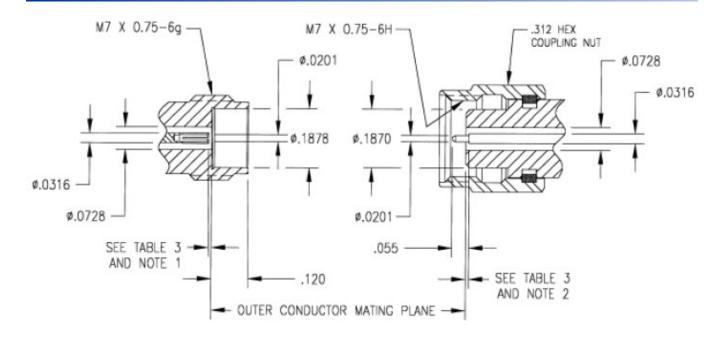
Critical Center Contact Location Dimensions for 1.85 Connectors
